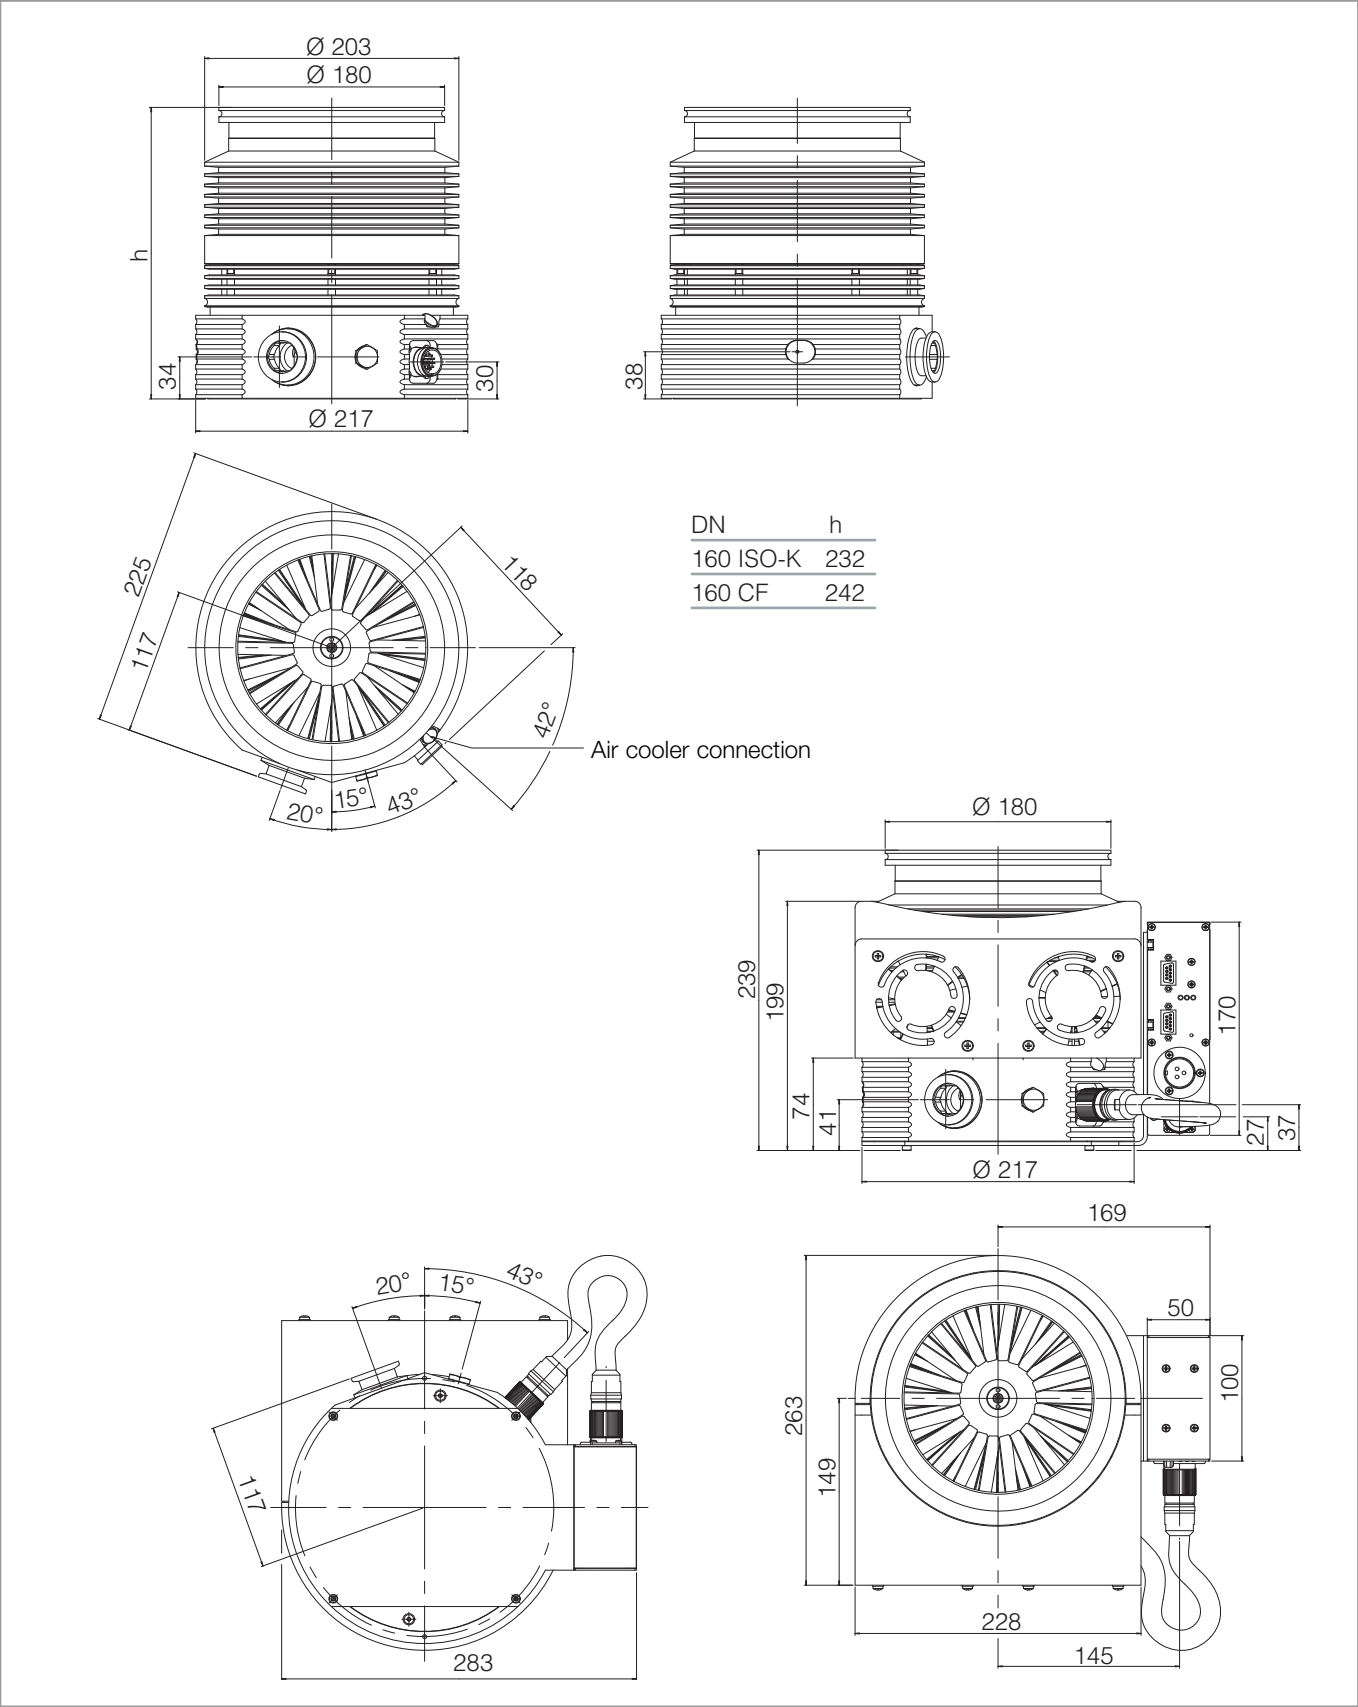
Dimensional drawings for SL 700 pumps (combination examples); dimensions in mm
